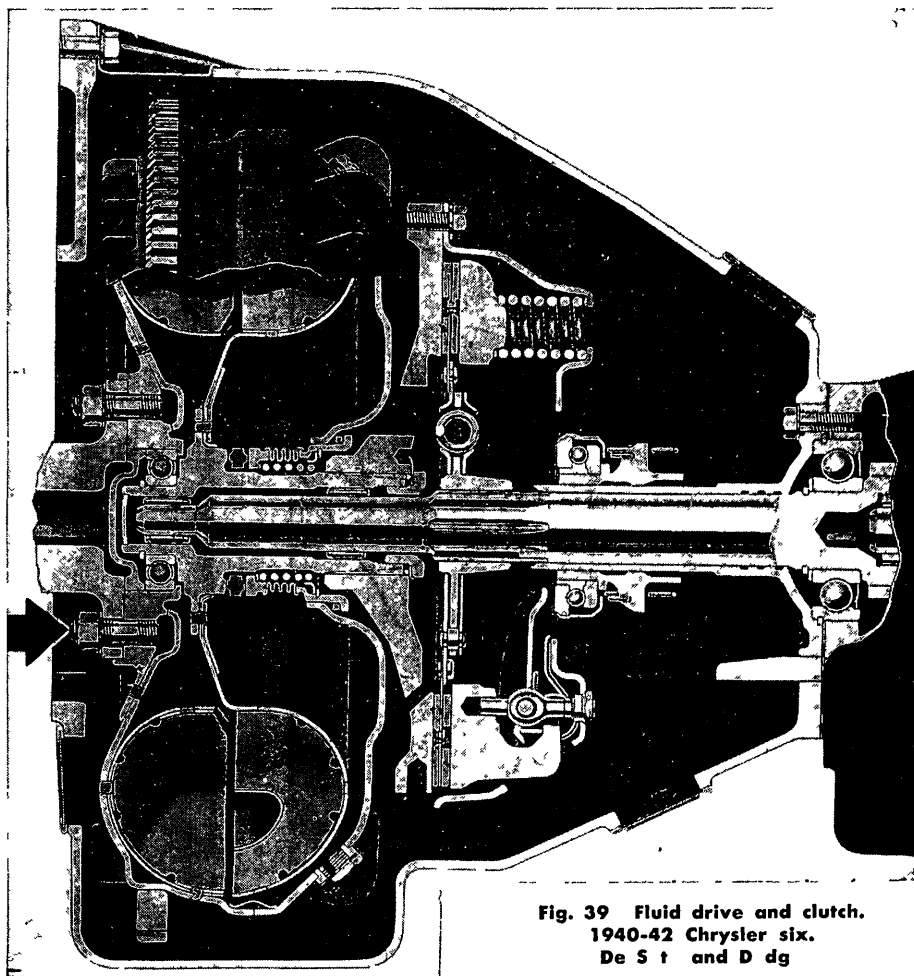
Fluid drive and clutch. 1940-42 Chrysler six. De Soto and Dodge
